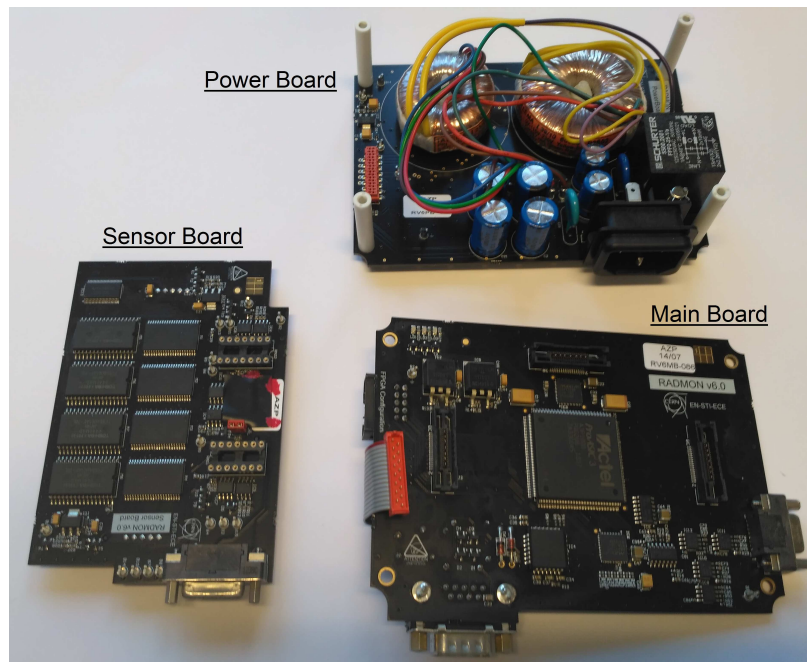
The three boards making up the RadMon V6 System: Power, Main and Sensor boards.
